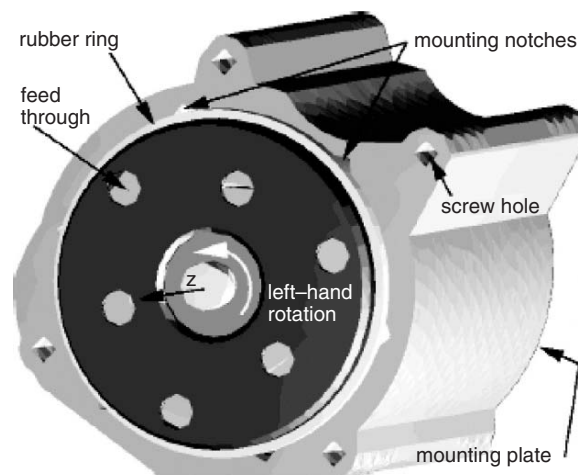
Definition of rotational direction; location of the mounting plate, the mounting notches, the screw holes, and the rubber rings.
